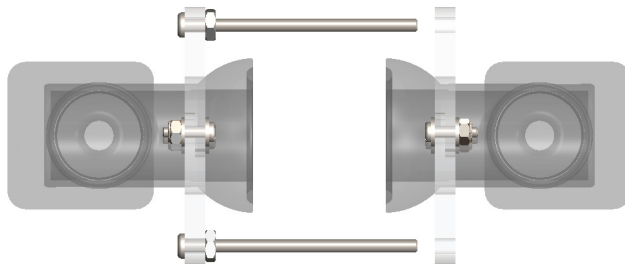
Tightening Rods Installed, Ready for Separator Material Insertion
